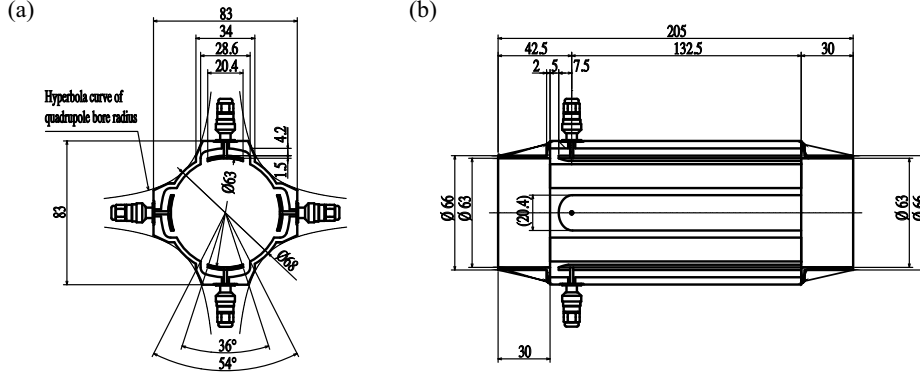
Mechanical drawings of the prototype new stripline-type BPM, (a) in front view and (b) in side view.
